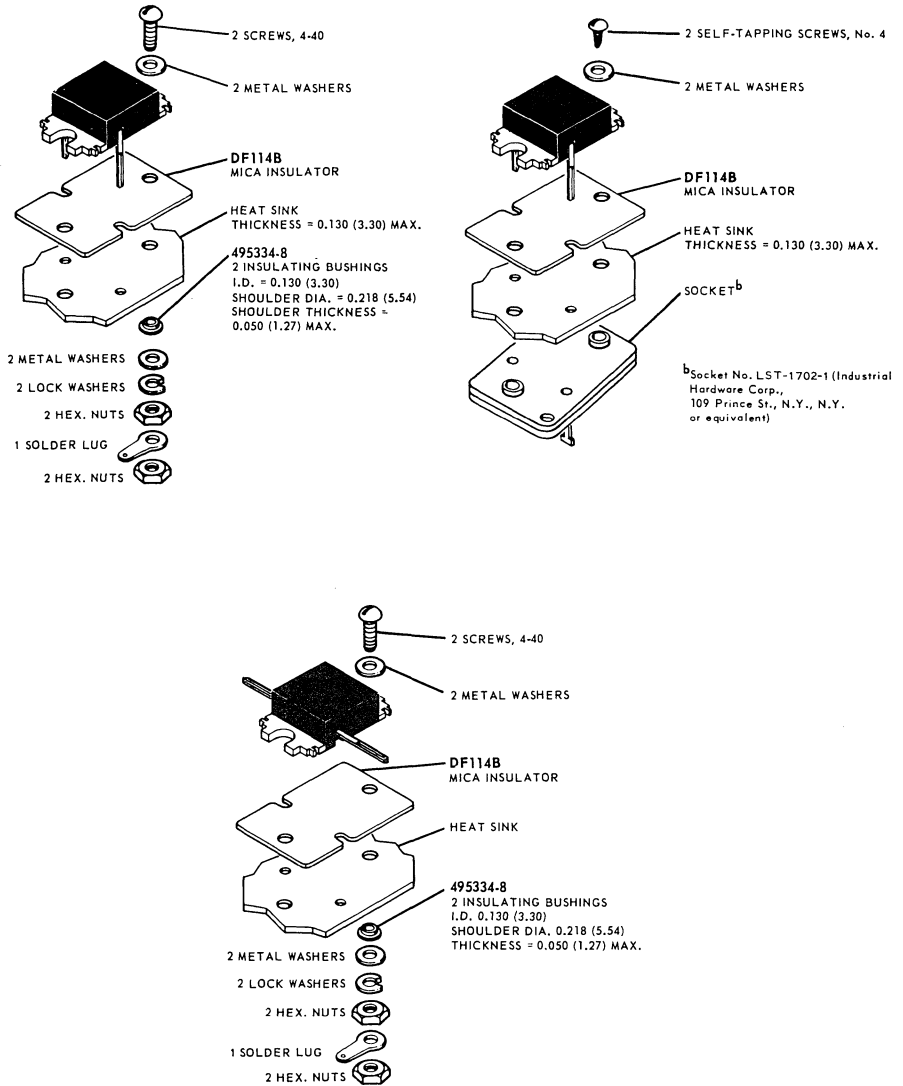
Mounting arrangements for high-power plastic-package transistors: (a) chassis mounting; (b) socket mounting; (c) printed-circuit-board mounting.
